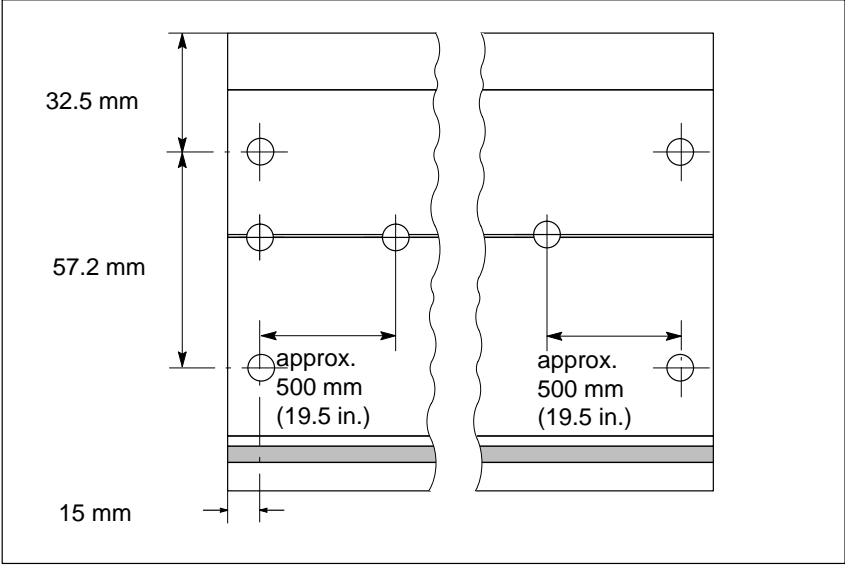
Dimensions for Fixing Holes on the 2 m/6.56 ft. Rail
